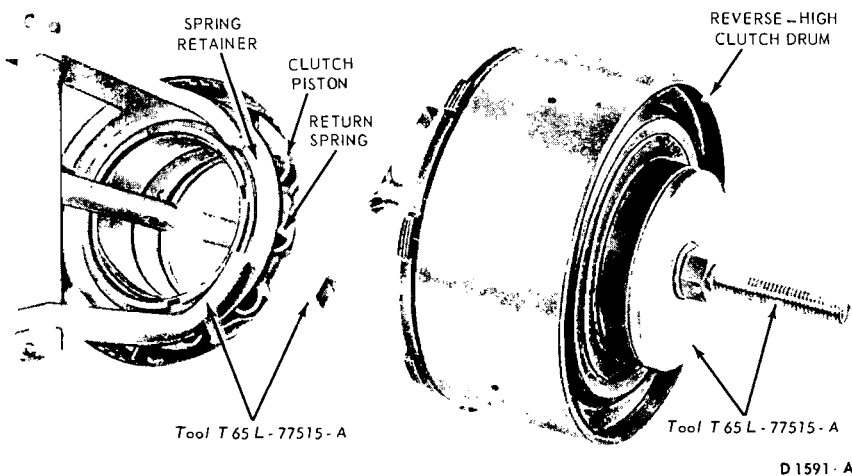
Removing or Installing Clutch Piston Spring Retainer Snap Ring
